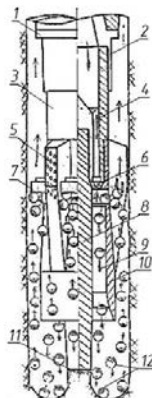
“PIM-216” tool string with the nozzle and circular mixing chamber [5]
